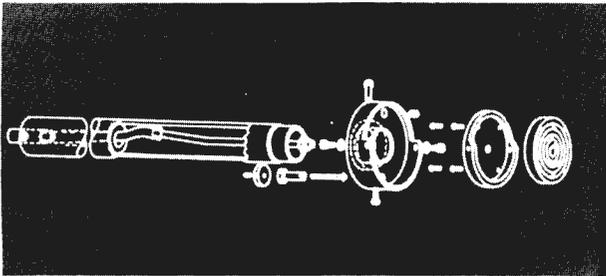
is an exploded view diagram of the tiltable vacuum holder we designed. The holder is constructed of an outer, fixed shell, and an inner, moveable member. The outer part is made of a 2" diameter stainless steel tubing that can be held in a machine chuck. A dish is mounted to the end of the tubing. In the dish are two pivot holes 180° apart. A knurled knob is attached to a 1/4" shaft and a steel spring located 90° from the pivot holes.
